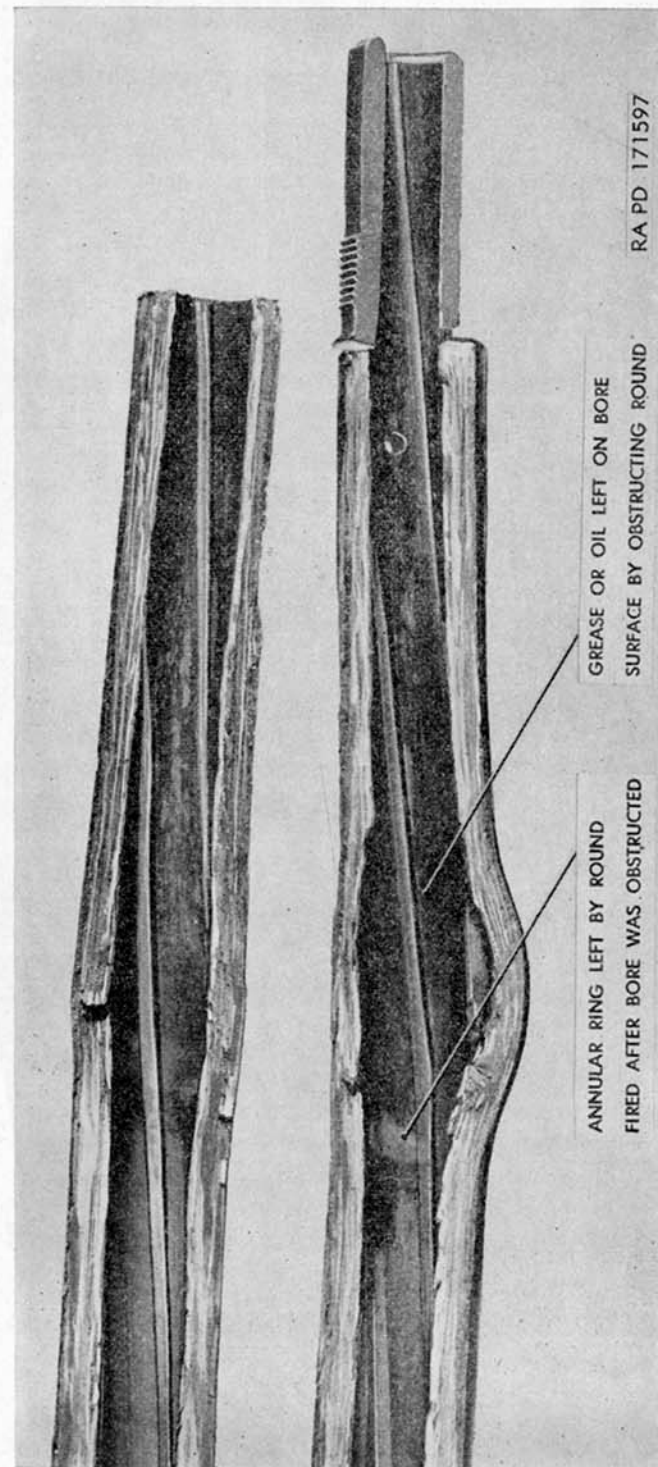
Cal..30 rifle M1 bore damaged by unexpelled bullet.
